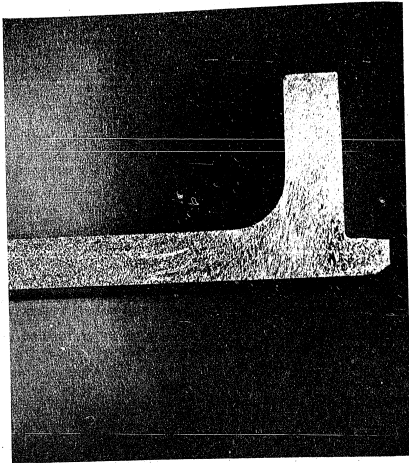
PHOTOMACROGRAPH OF A SECTION OF THE FIRST SUCCESSFULLY UPSET PROTOTYPE TURBINE ROTOR SHAFT.
